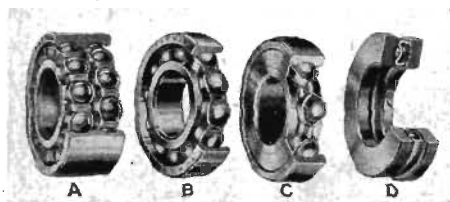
Types of ball bearings: A, double-row; B, single-row; C, single-row, with ring seal; D, end thrust bearing.
